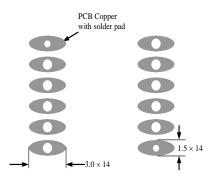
Top View of the Bottom Side PCB Foot-print Figure 24 shows the view of the bottom side PCB footprint.
